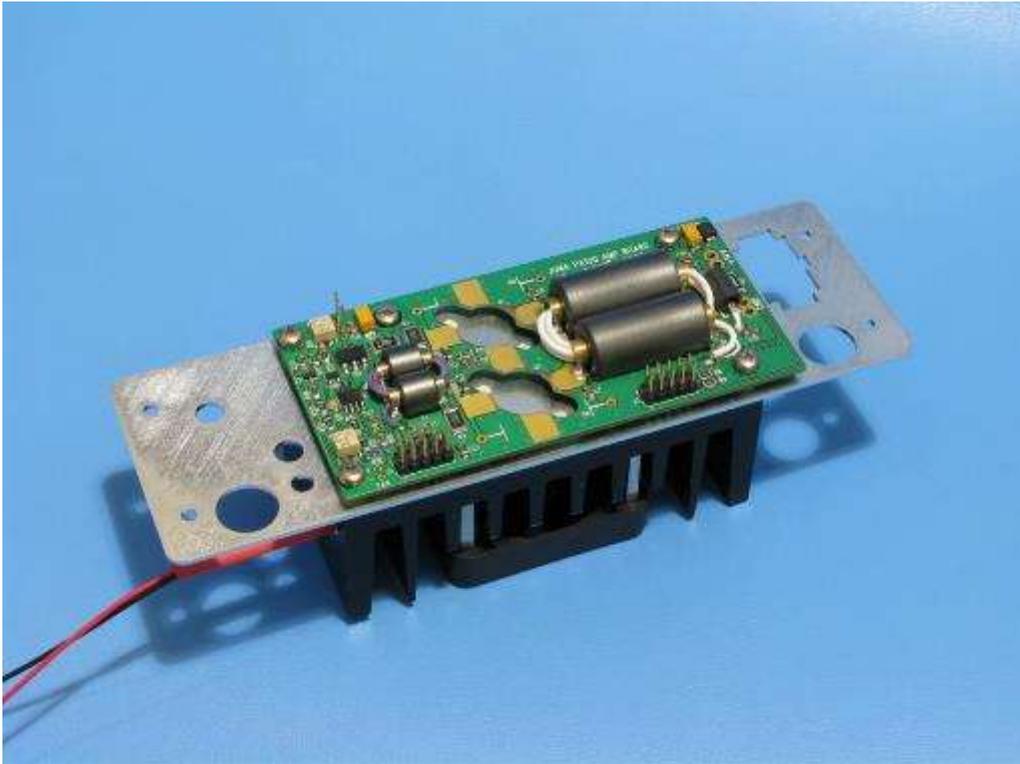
Fix the PCB. Tighten the screws loosely and align the board, the rear plate and the heatsink
